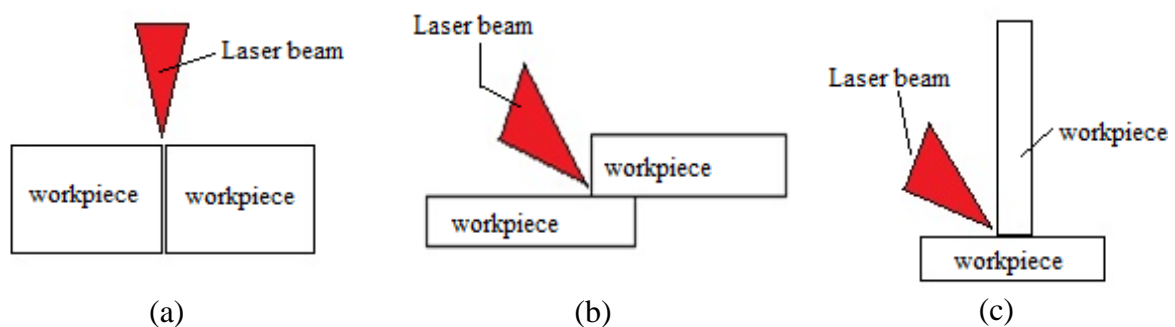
Different kinds of weld joint: a) butt joint, b) lap joint, c) T-joint.
